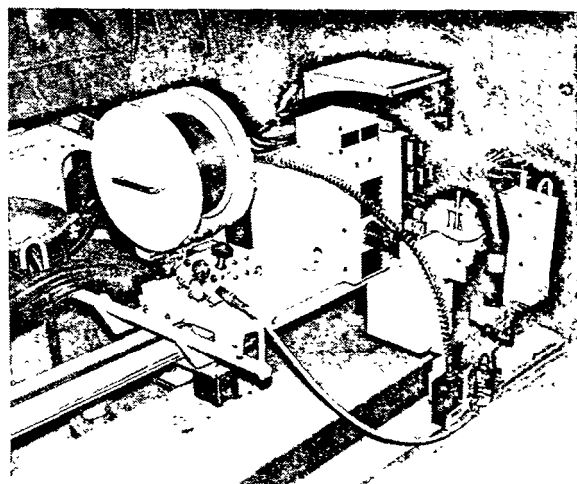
SHORT INTERMITTENT WELDING
